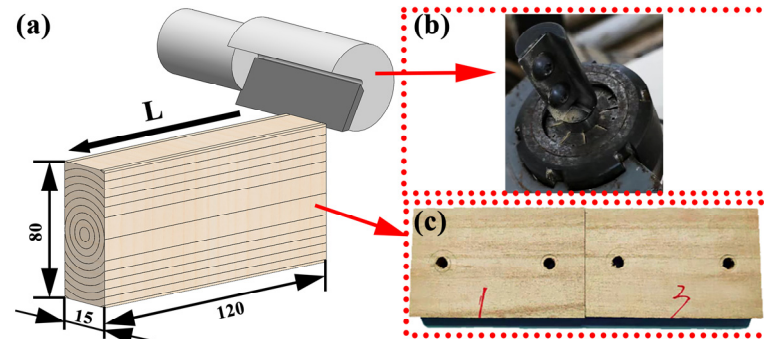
Paulownia milling diagram: (a) milling diagram; (b) milling tool; (c) Paulownia workpiece.
